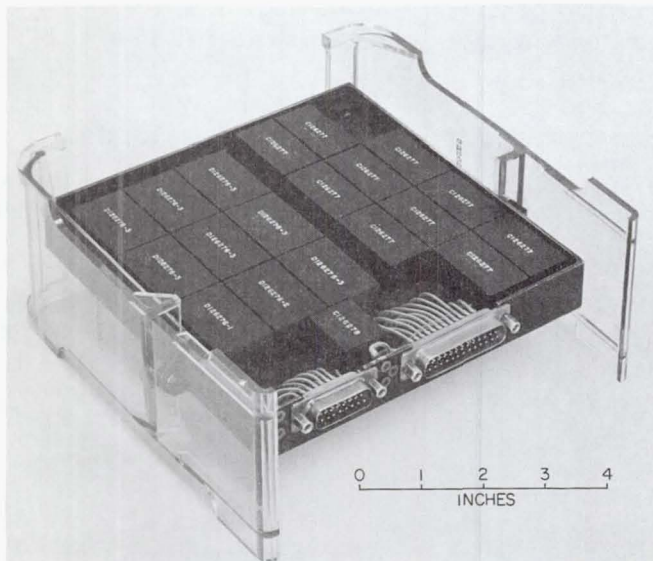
Welded prototype (PHA) decoder subassembly - modular matrix
